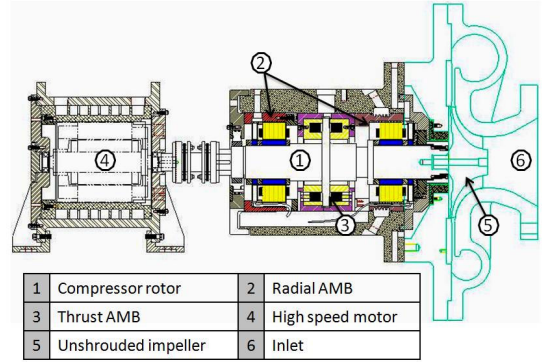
The single stage centrifugal compressor in the experimental setup operates with an unshrouded impeller and a vaneless diffuser. The rotor is radially supported by two radial AMBs, and a single thrust AMB provides the axial support.
